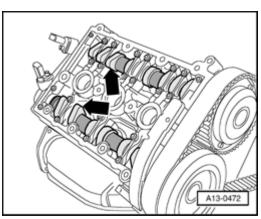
Turning Engine Until Cams At Intake And Exhaust Camshaft Of Cylinder 3 (Right Cylinder Bank) Point Upward Uniformly
